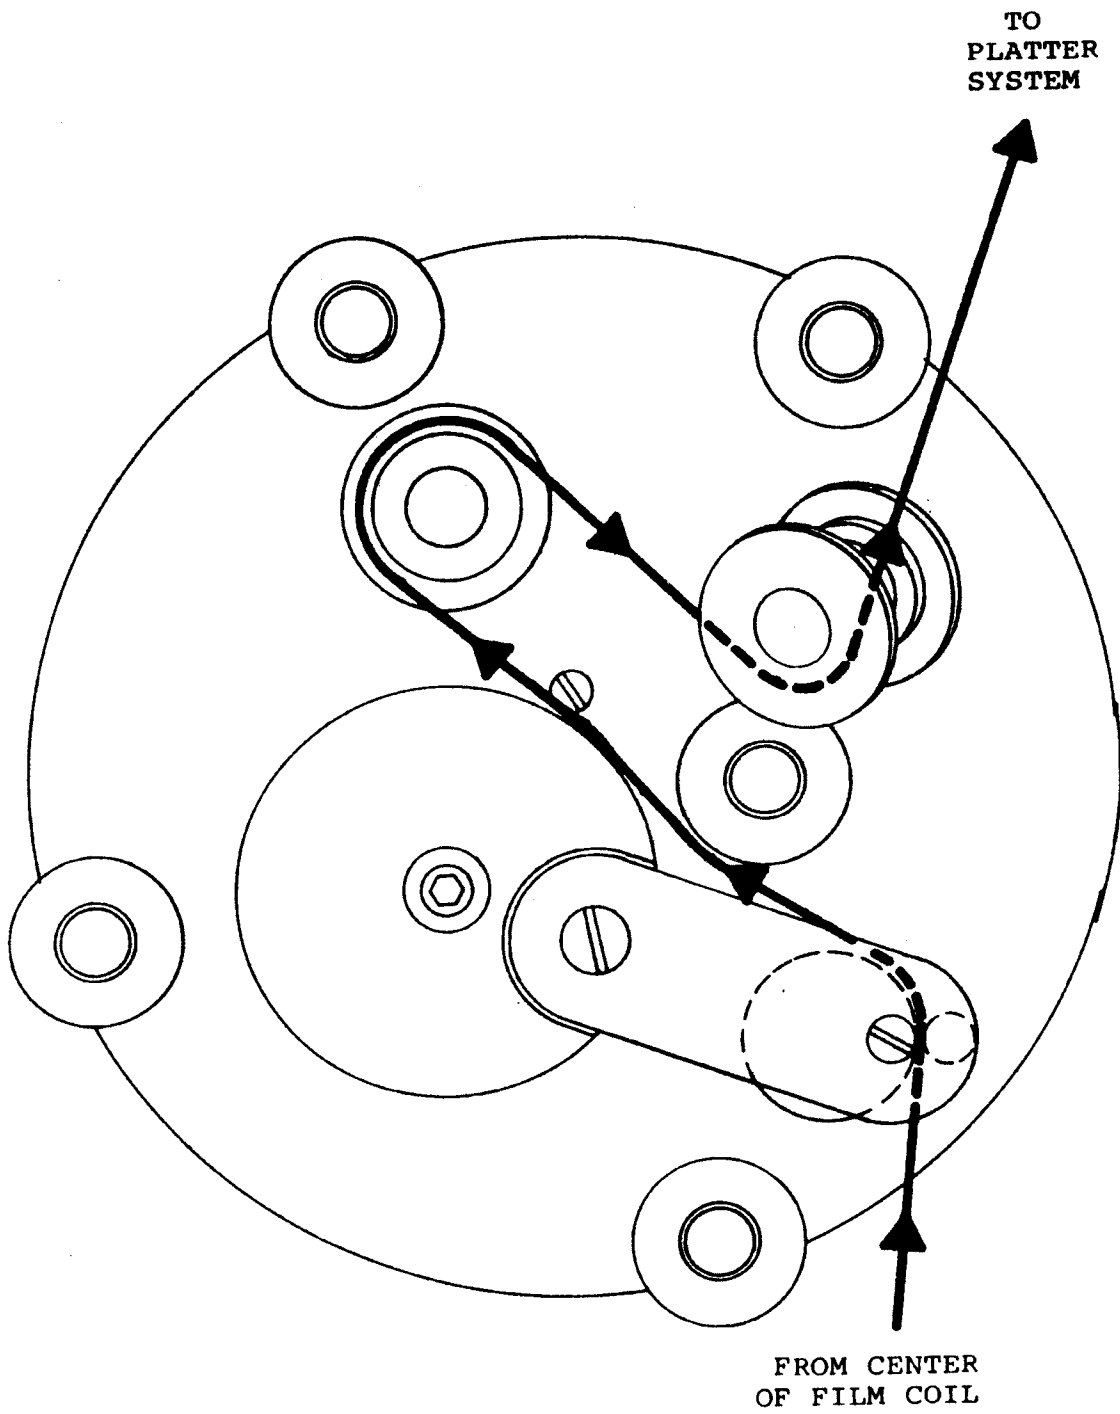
THREADING DIAGRAM - CONTROL CENTERPIECE
